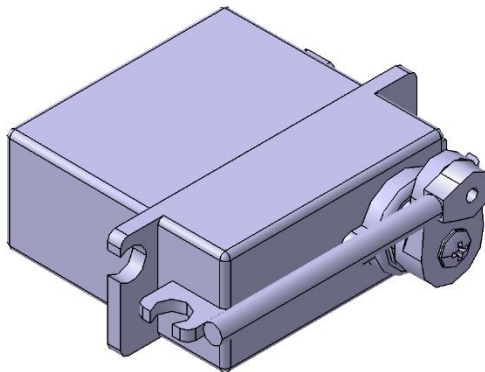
The Assembly of Volz DA 13-05-60 Servo Actuator
